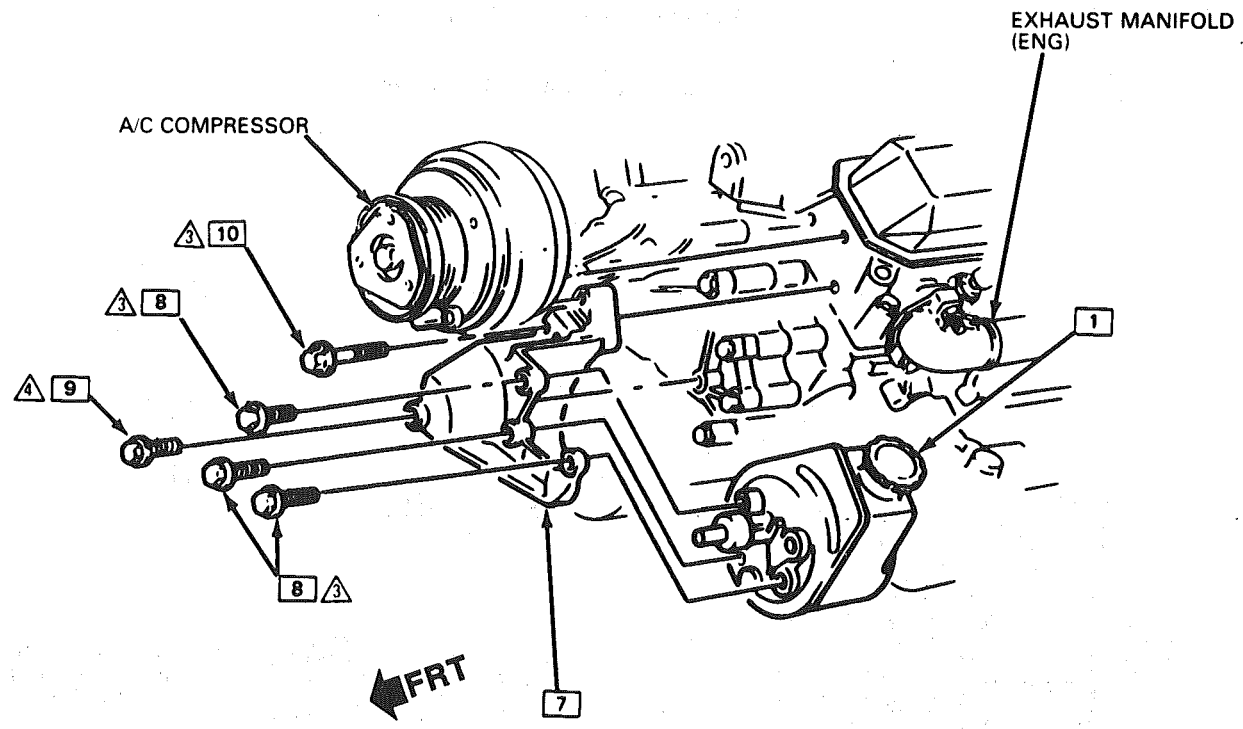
B7-5 Power Steering Pump Mounting for Engines LO3/LB9/L98
